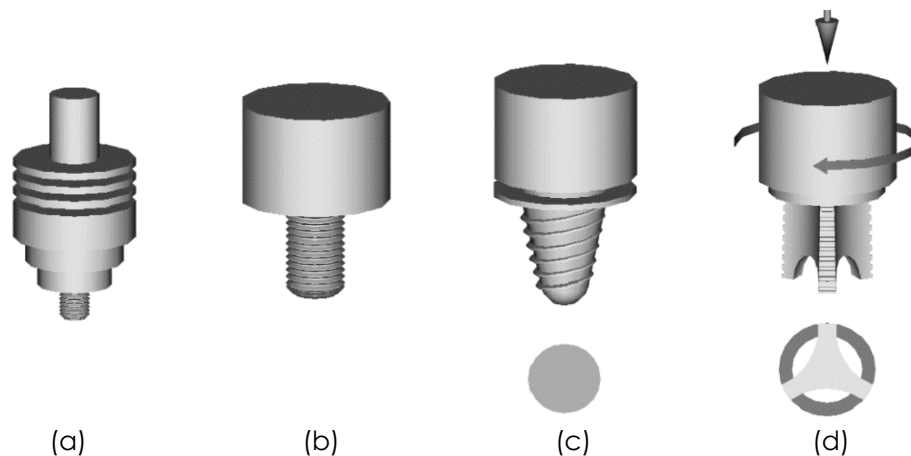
Tool shapes for FSW. (a) Stepped shoulder with cylindrical threaded pin; (b) Flat shoulder with cylindrical threaded pin; (c) Flat shoulder with tapered pin; (d) Flared-triflute pin [2-19].
